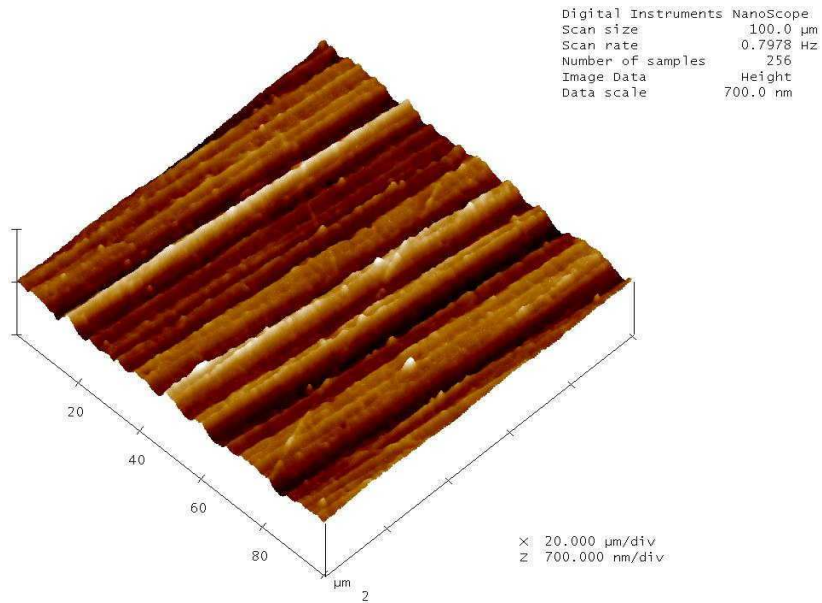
AFM photo. of cutting surface ($A/_{6061}/ 500 \text{ km}$)
